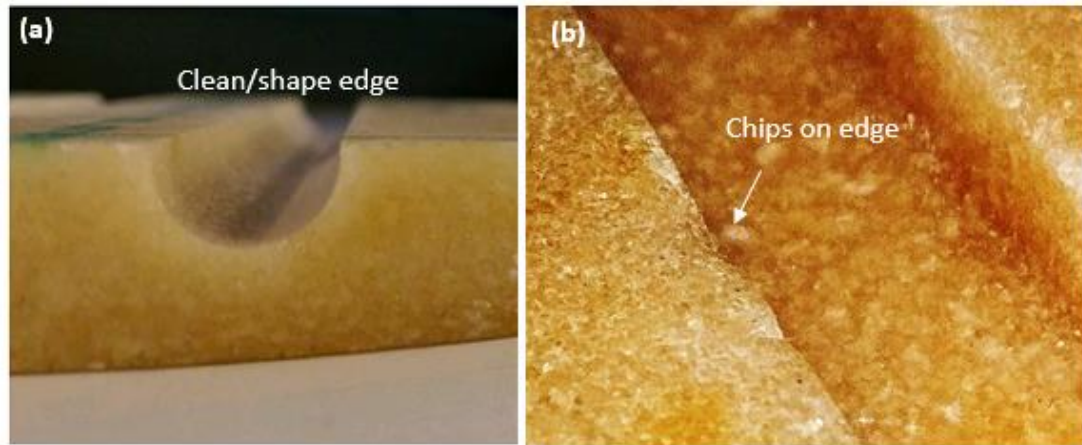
The NT Core after end-milling with a Ø10mm ball-nose cutter (a), a Ø10mm flat cutter (b)
